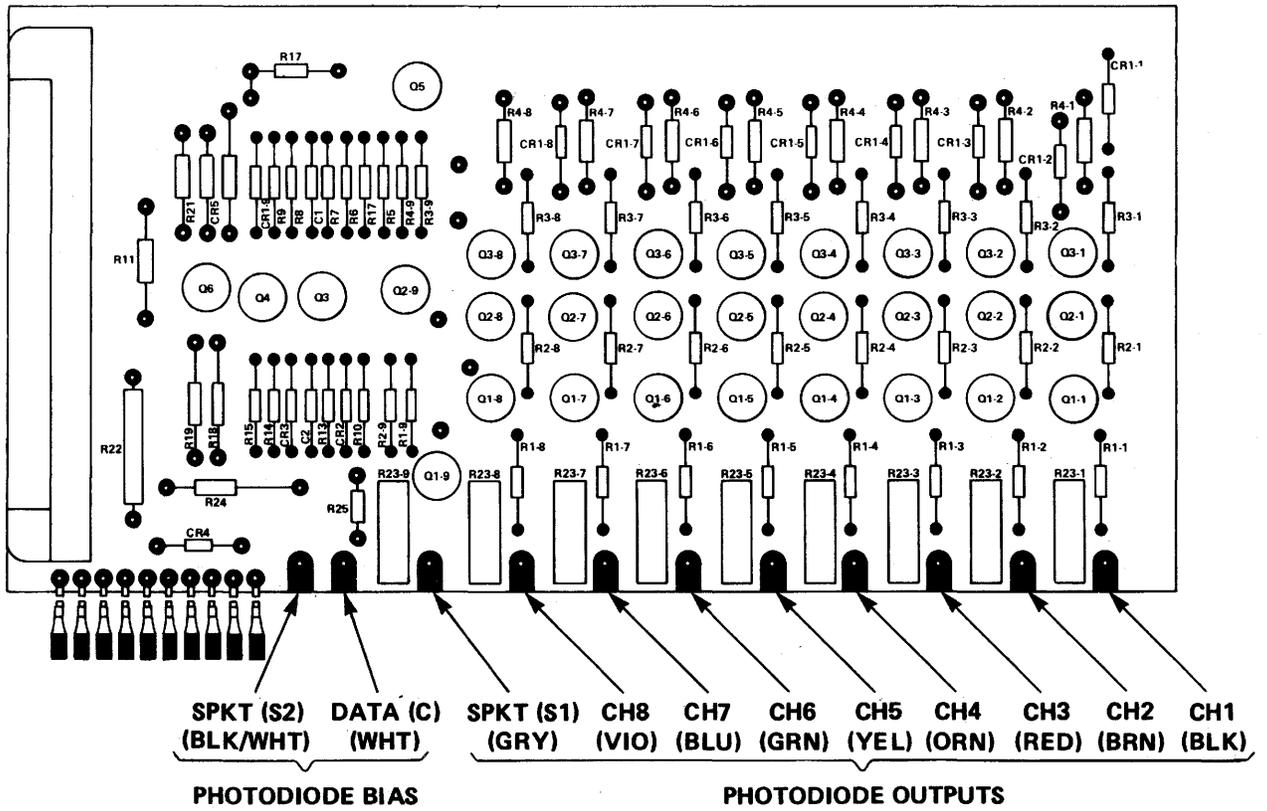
LAC Board Locations (Sheet 2 of 2).
